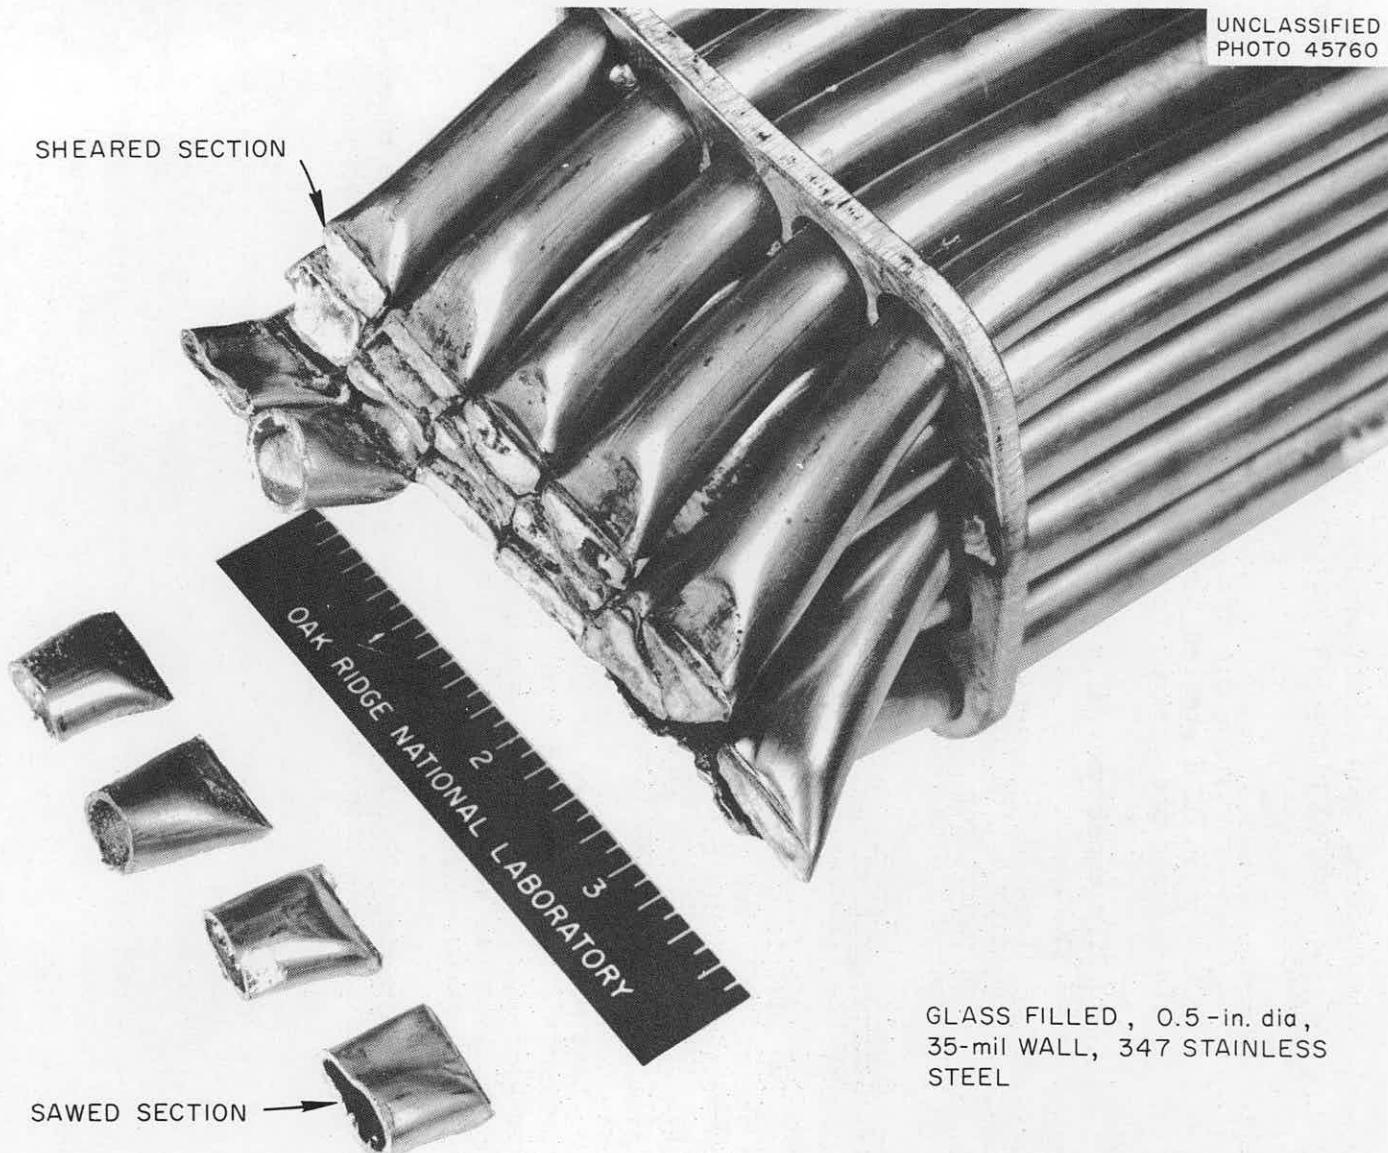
Sheared Section of $3\frac{7}{8}$ -in. Square Prototype Fuel Assembly.
